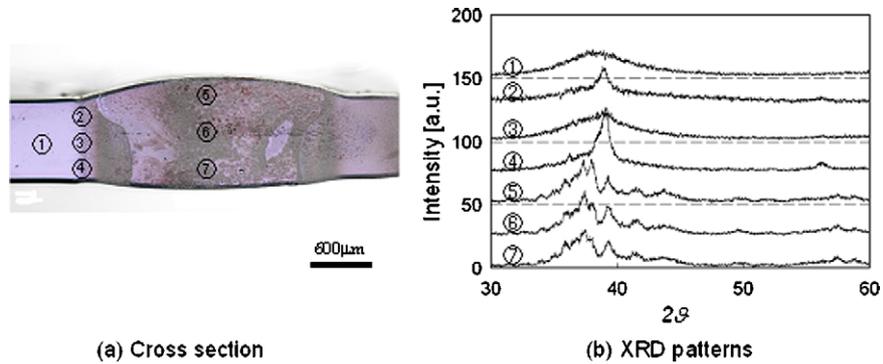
Cross sections and XRD results of weld bead produced in bead-on-plate welding of 1 mm-thick metric glass $Zr_{55}Al_{10}Ni_5Cu_{30}$ at 48 m/min welding speed.
